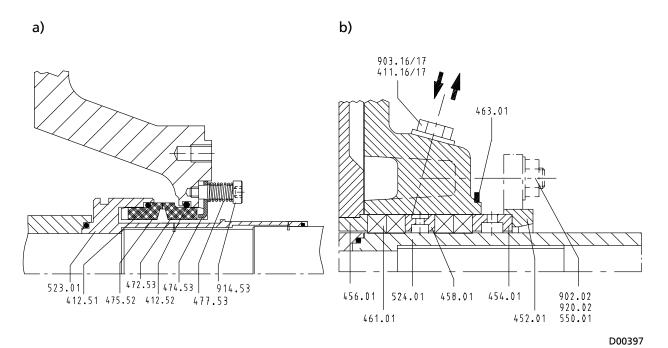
a) 4K mechanical seal; b) coolable gland packing
